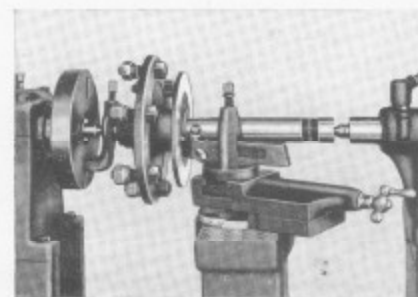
Taking a Light Cut to True Up Bent Hub Flange Mounted Between Lathe Centers.
